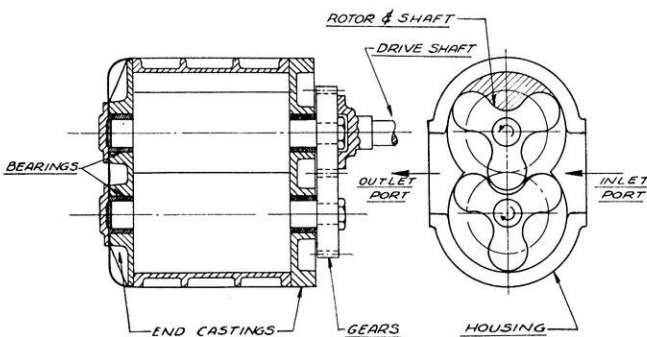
Main parts of the Roots type supercharger using the three lobed rotor. Shaded area shows trapped air being "compressed."
